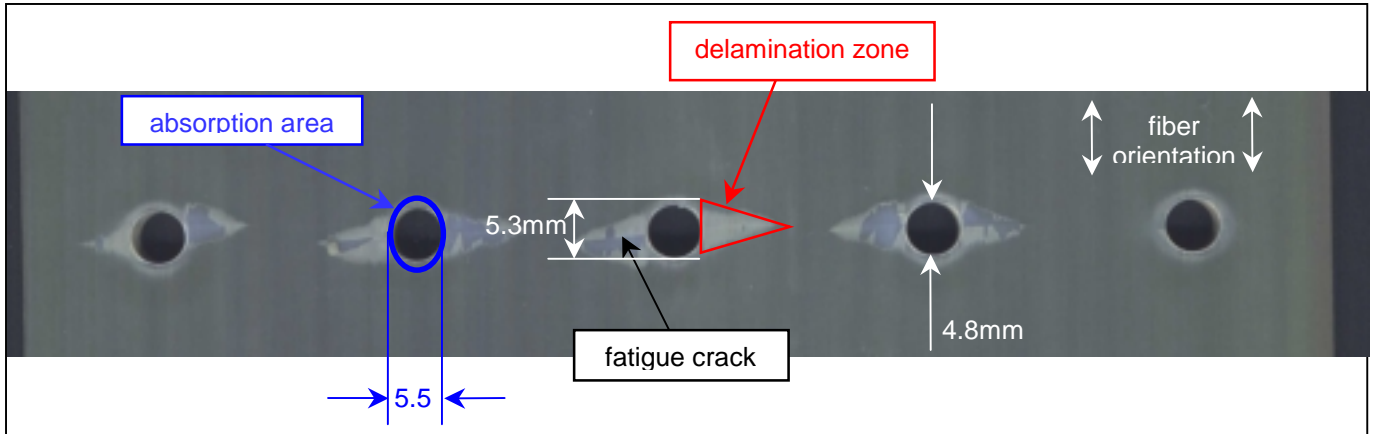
Specimen 3-B-38, view on first prepreg- and second aluminium layer after 523 hours ageing at 70°C/85%RH (filled hole, clearance fit) and subsequent fatigue crack propagation testing
